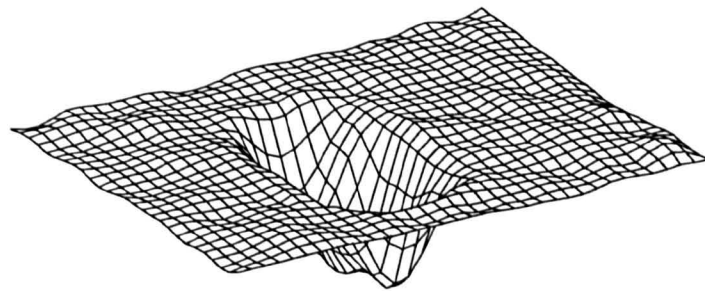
(a) 3D representation of defect in aluminium test-piece
